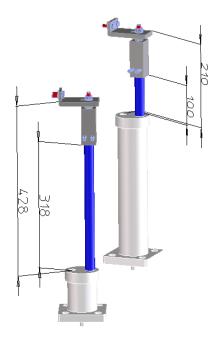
Dimensions of the inner brackets (long rod on the left and short rod on the right)
